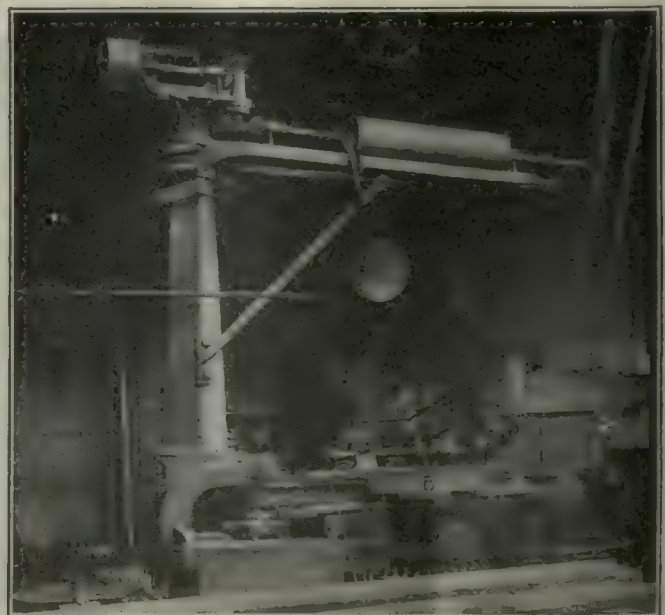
POOLE MORTISE GEAR-CUTTING MACHINE
